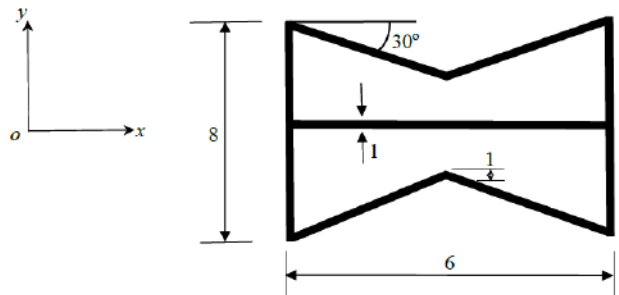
Dimensions used in the auxetic structures of the presser. Unit for the dimensions is mm. The membrane is also 1 mm thick.
